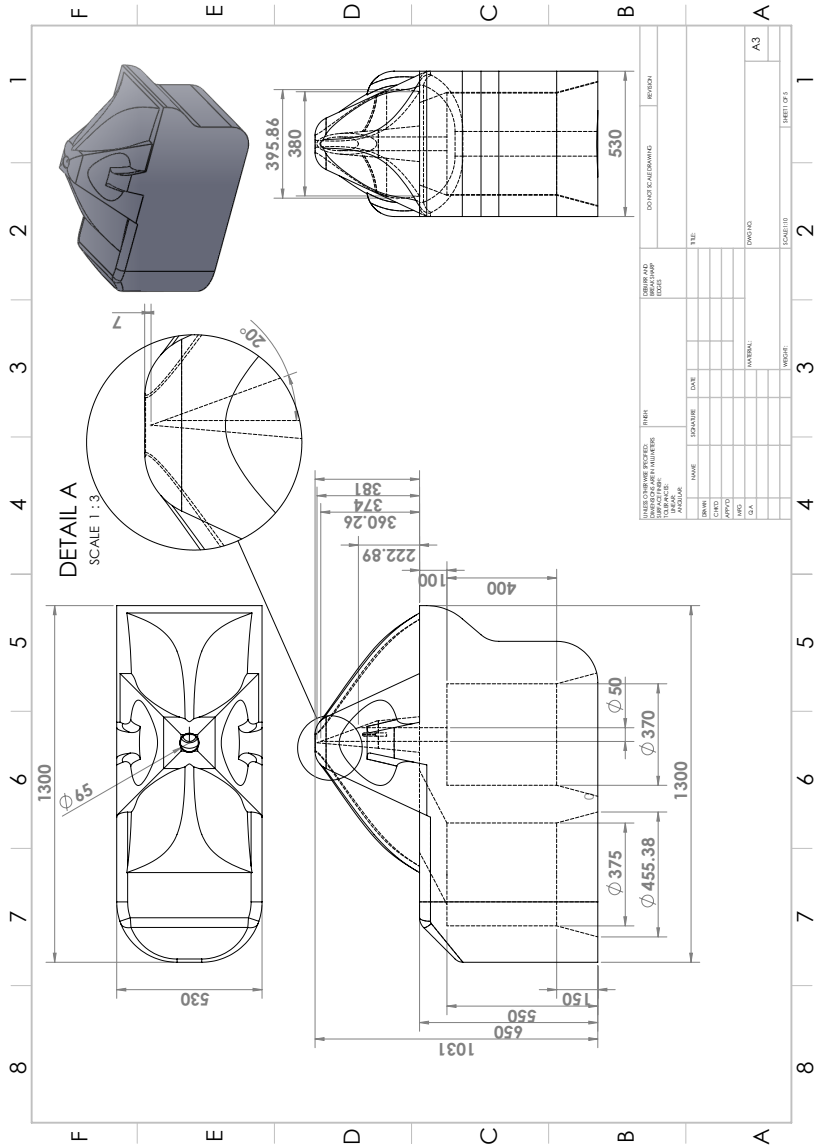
Sheet 1 of the 79 design; 3rd angle projection drawing of the design.
